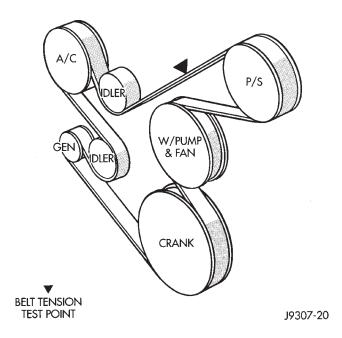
YJ Models with 4.0L Engine, and XJ Models with 2.5L 4-Cylinder Engine—With A/C
